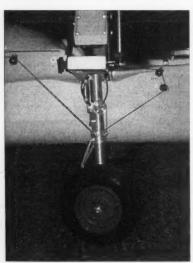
Photo D. Forward landing gear assembly before final anodizing. A hydraulic cylinder clamped to tensioned stainless cable rotates a teflon-lined collar, which couples steering inputs via the scissors assembly to the spindle bearings that carry the wheel. A column of elastomeric bumpers provides 8" of suspension travel with a 4G limit. The entire strut is retracted and extended by lines, driven by levers at the gunwales, which also add hydraulic control inputs to rotate the wheels into operating position.
